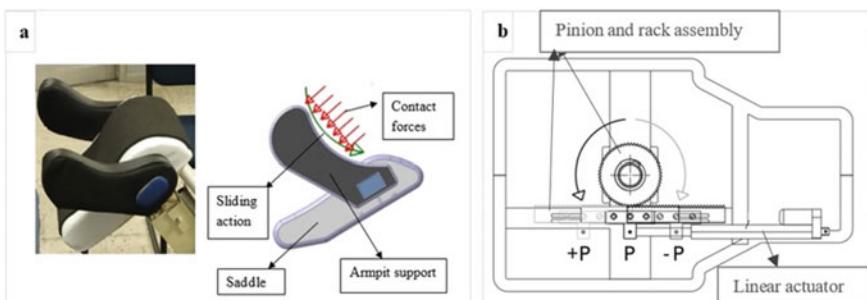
a Armpit support mechanism. [Physical prototype (left) and CAD model (right)] and b lower turning drive system
